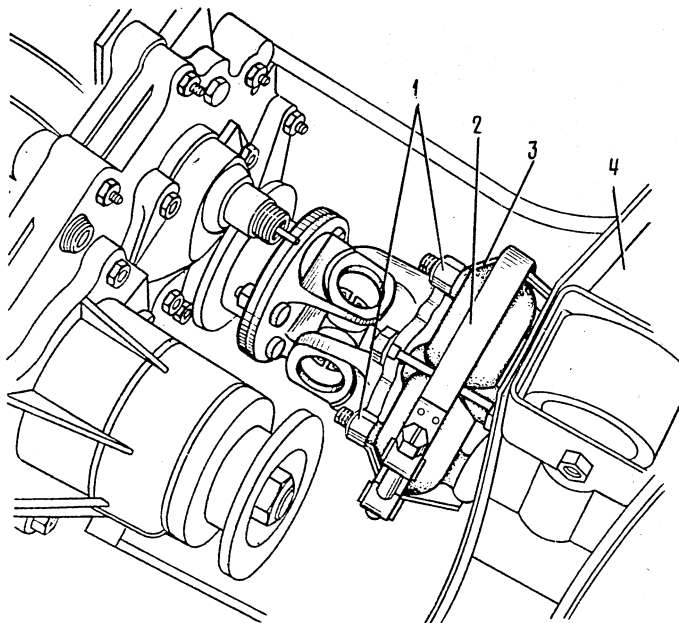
Propeller-Shaft-to-Gearbox Flexible Coupling:
